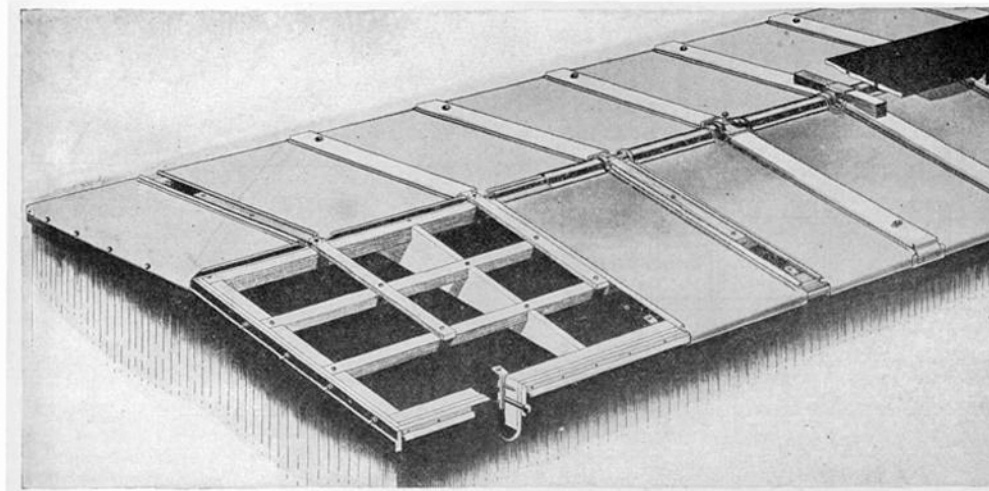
Hutchins All-Steel Roof to Replace Inside and Outside Metal Roof
